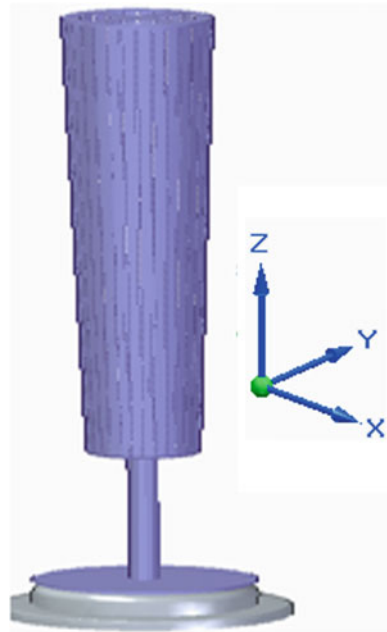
CAD Model of BWG of mentioned dimensions without perforations designed with Solid EdgeV20 [13]
